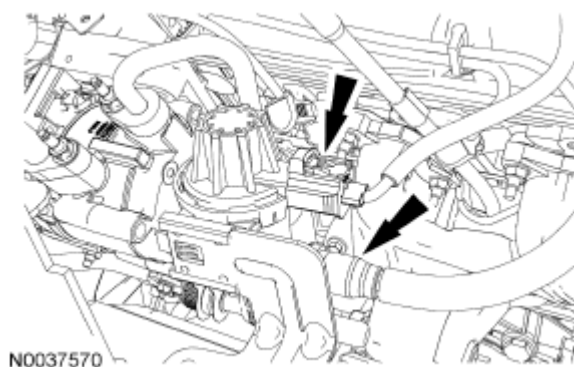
Locating Evaporative Emissions (EVAP) Hose And EVAP Canister Purge Valve Electrical Connector
